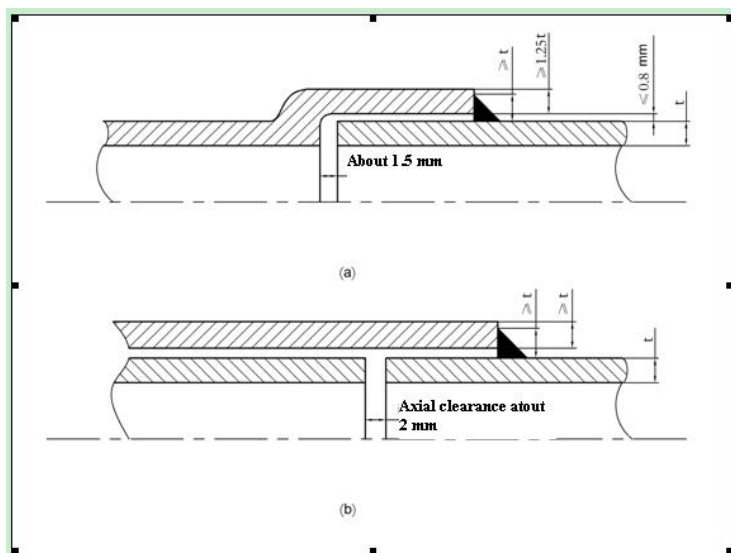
Socket Weld Connection and Sleeve Weld Connection
